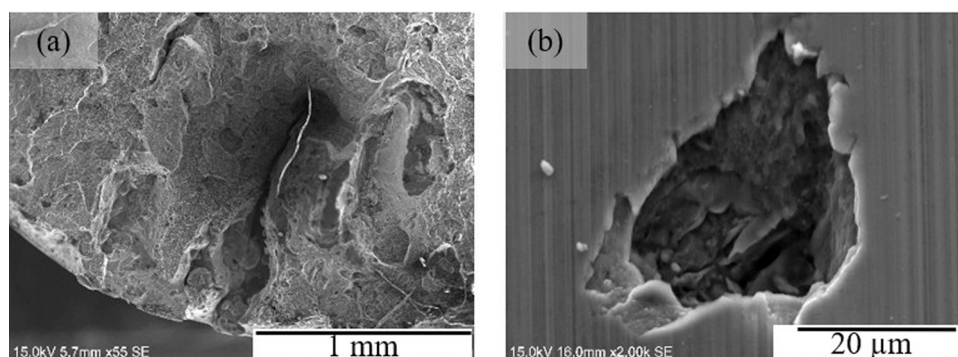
(a) Pit and associated crack on the fracture surface of an HT3W specimen after SCC test. (b) Pit on the outer surface of an HT specimen after SCC test.
